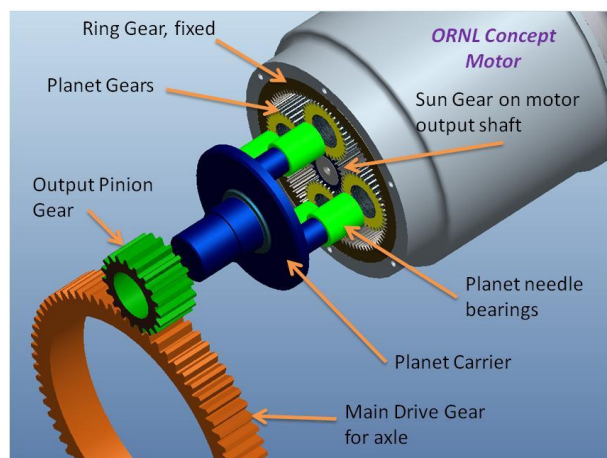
Exploded view of ORNL concept driveline with MagnaPowertrain calculated gears.
